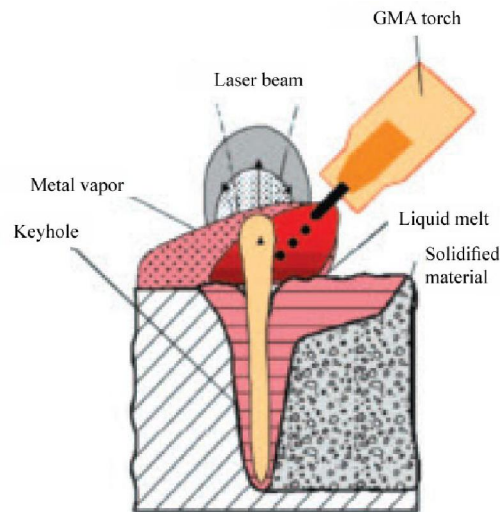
Hybrid laser welding combines the attribute of GMAW and laser beam welding [149]
